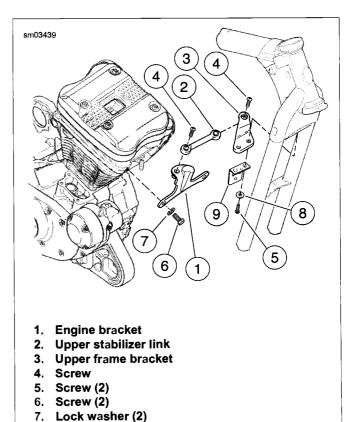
Upper Front Stabilizer Link Assembly: (typical)
